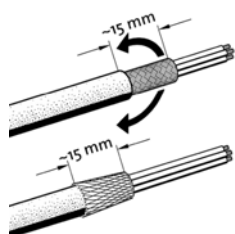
Connecting cable shields to the EMC threaded cable connections (SC...FC WM)
